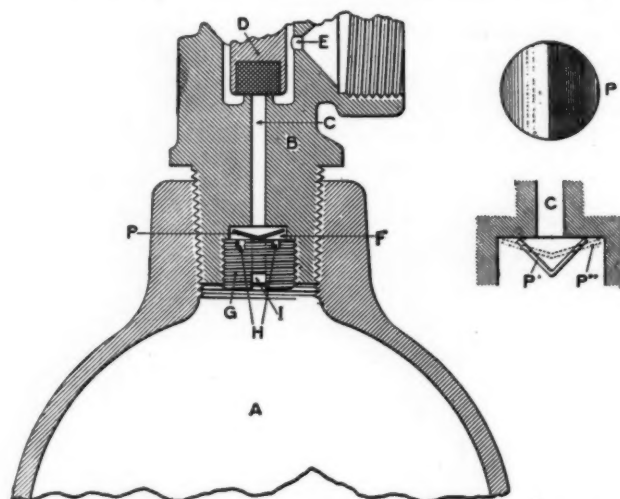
Cross of bottle head, showing details of pressure equalizer. Small drawing at right shows equalizer on enlarged scale.
